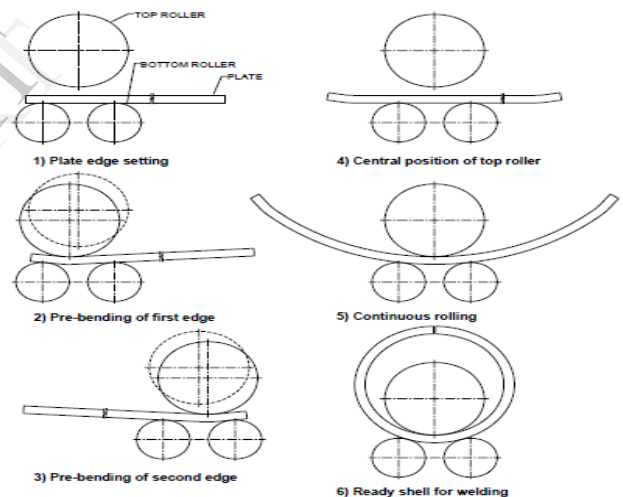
Three Roller Sheet Rolling Sequence for Fixed Bottom Roller Gap
